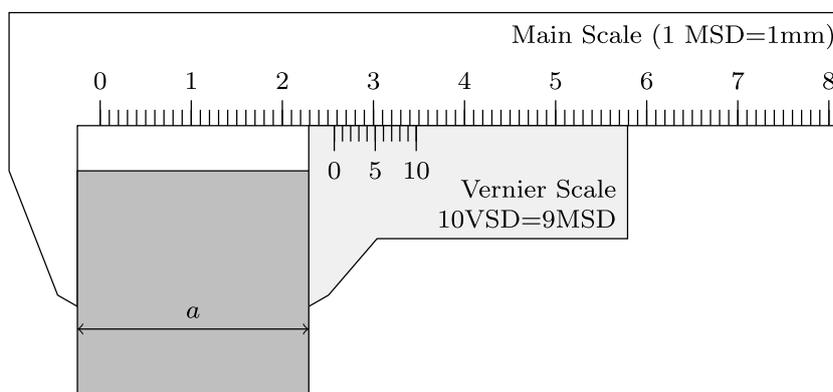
Example 3: Measuring the edge of a cube with the Vernier caliper of Example 1.
